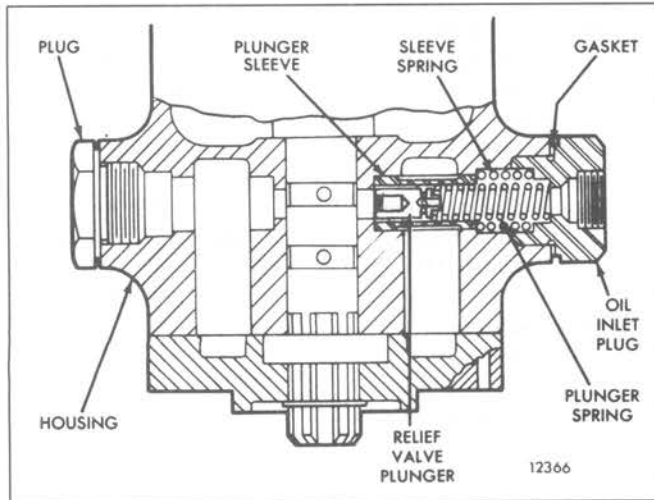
Location of Oil Relief Valve Plunger, Plunger Sleeve, Springs, Oil Inlet Plug and Dummy Plug
